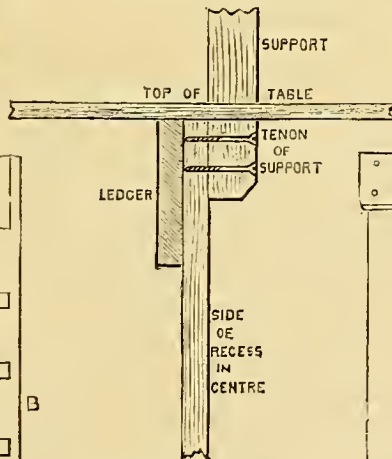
TRANSVERSE SECTION SHOWING HOW SUPPORTS OF GLASS ARE FIXED.
